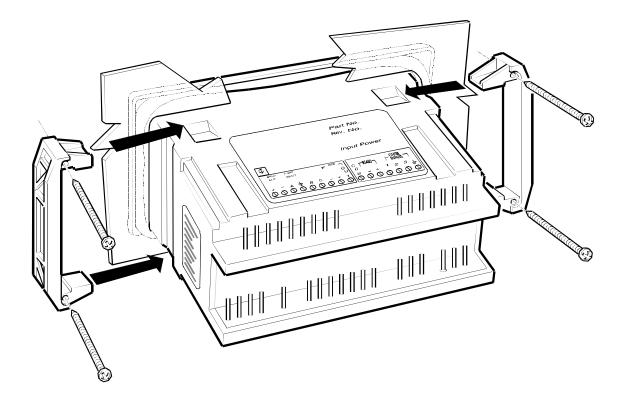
Panel Mounting Detail — O-ring and Mounting Clips
